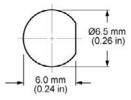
Recommended Mounting Hole Dimensions for the CSS-SGAF-050-STTN Cable Assembly
